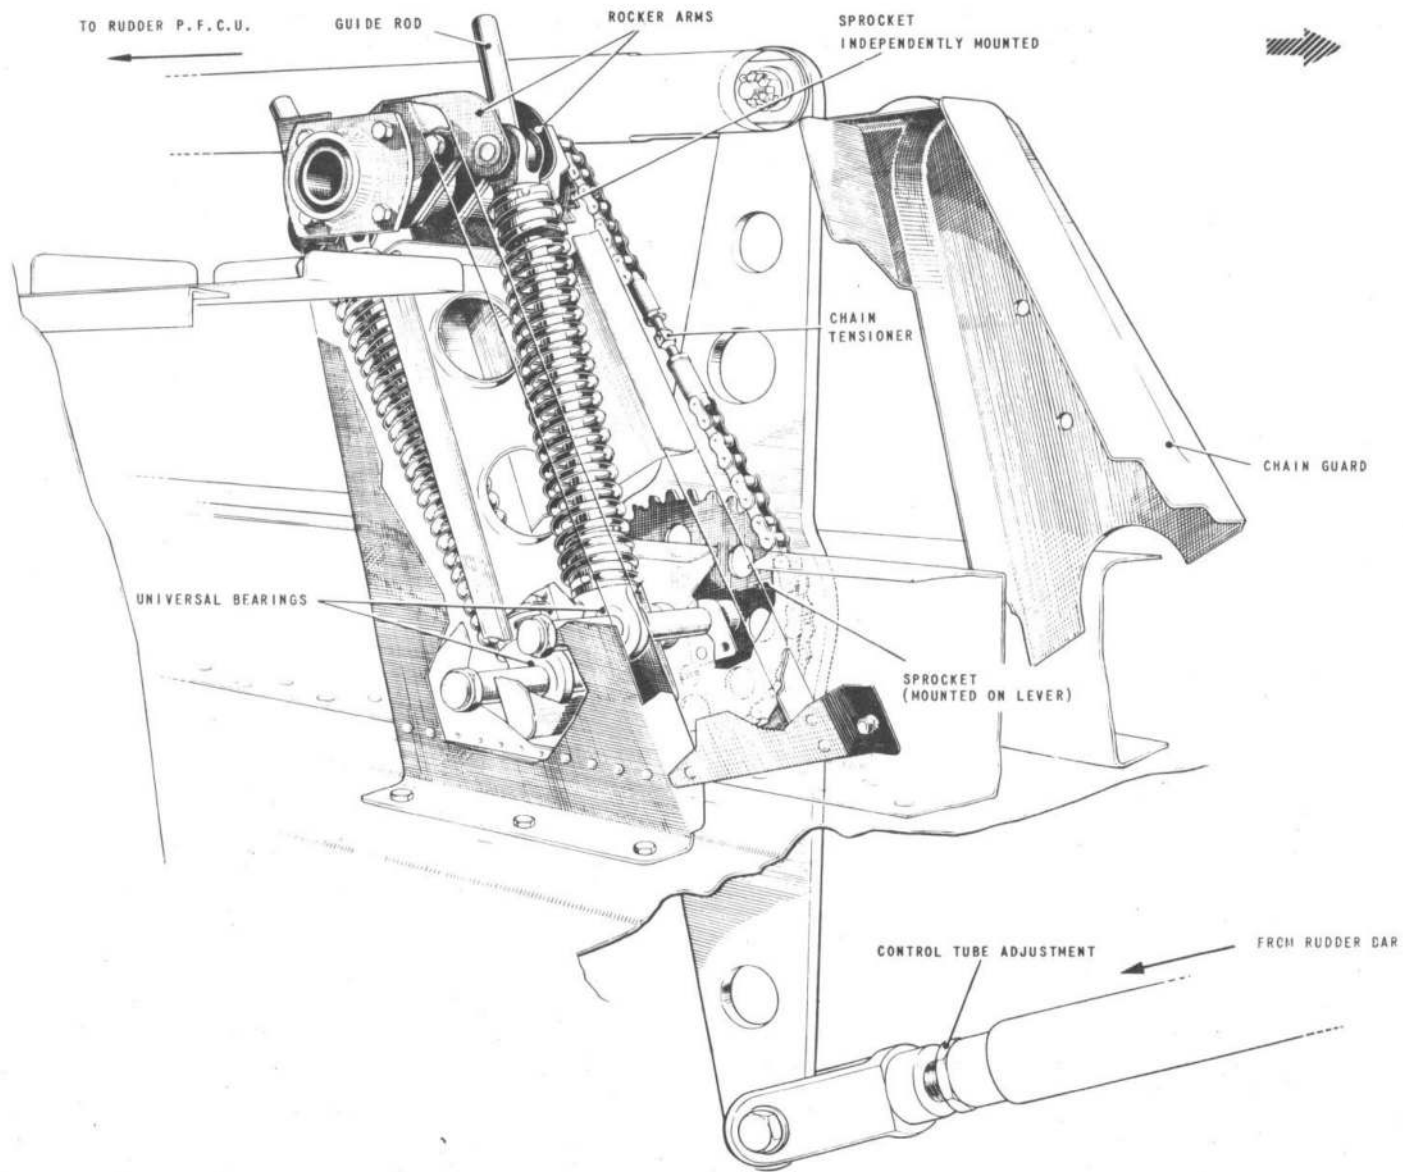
NON-LINEAR SPRING FEEL MECHANISM
